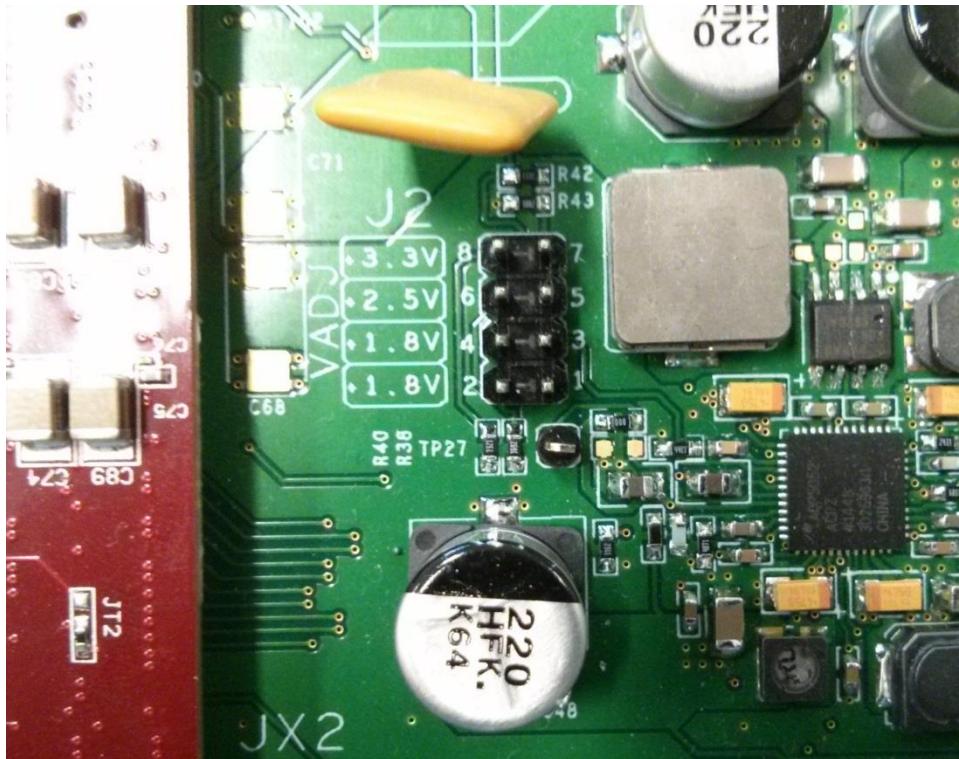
CARRIER BOARD VADJ DEFAULT JUMPERS J2 = NO JUMPER
